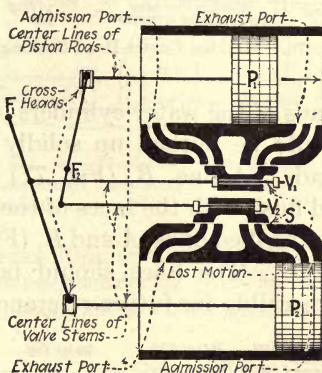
Piston  $P_2$  At End Of Head-End Stroke And On Point Of Reversal. Piston  $P_1$  Approaching End Of Head-End Stroke.
